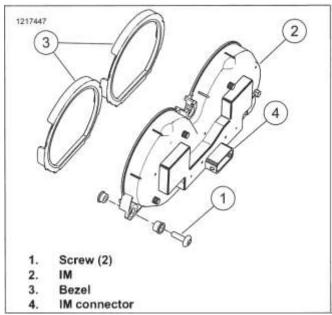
Instrument Module: Fork-Mounted Fairing
